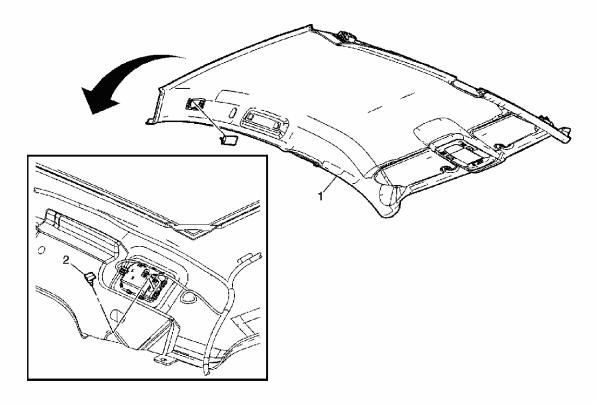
View Of Roof Rail Rear Courtesy Lamp Switch Courtesy of GENERAL MOTORS CORP.
